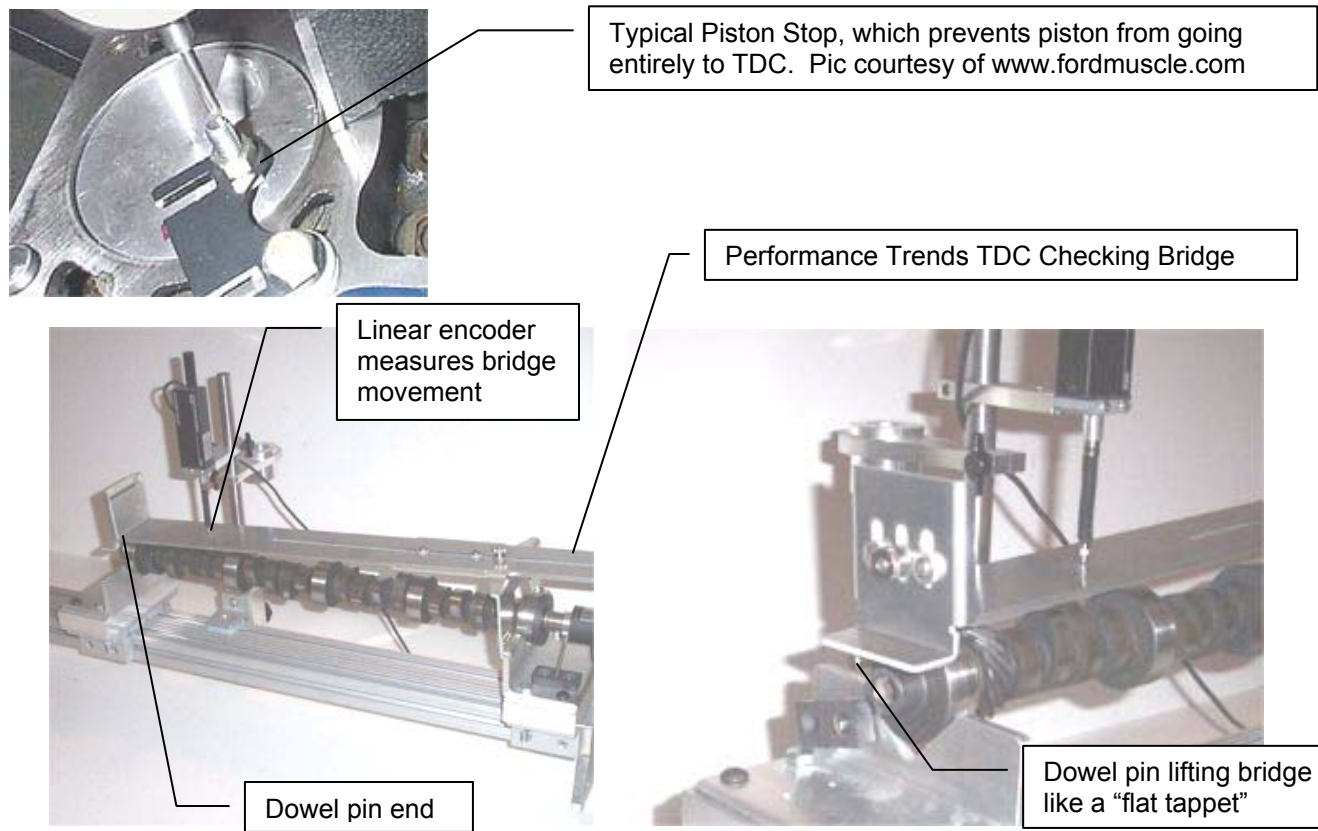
Dowel Pin or Keyway Location Input in Cam Design Layout Specs
